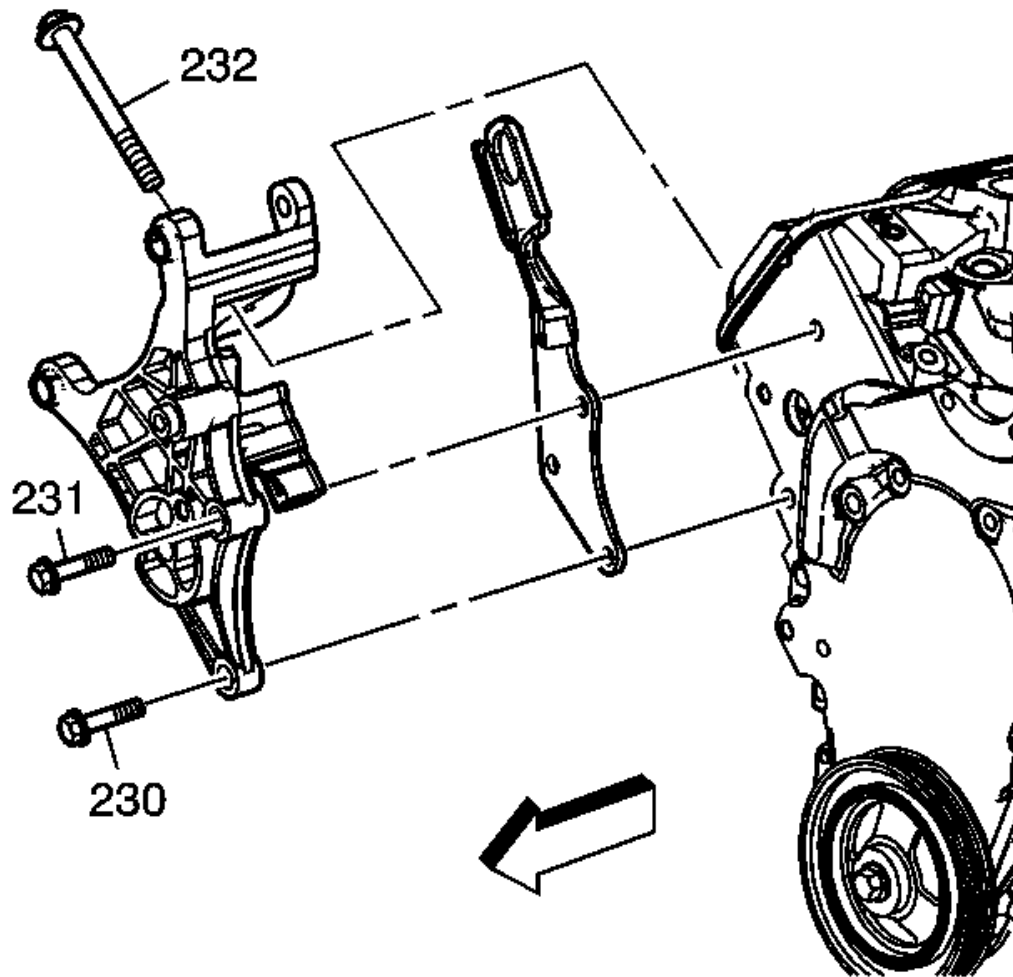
View Of Generator Bracket Assembly, Bolts & Front Engine Lift Hook
